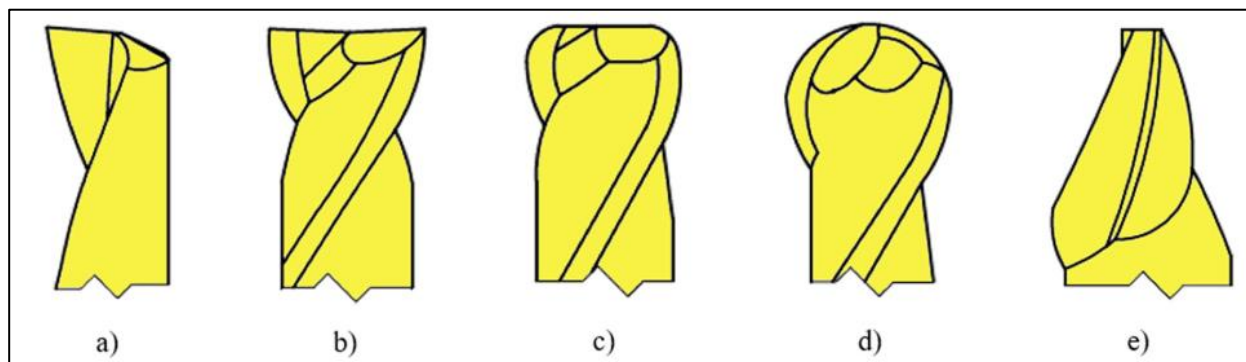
Types of Micro tools used in micro milling adapted from Balázs, Barnabás Zoltán, et al. [172] (a) single-fluted flat end (b) Double-fluted flat end (c) corner radius end mill (d) ball-end (e) tapered micro end
